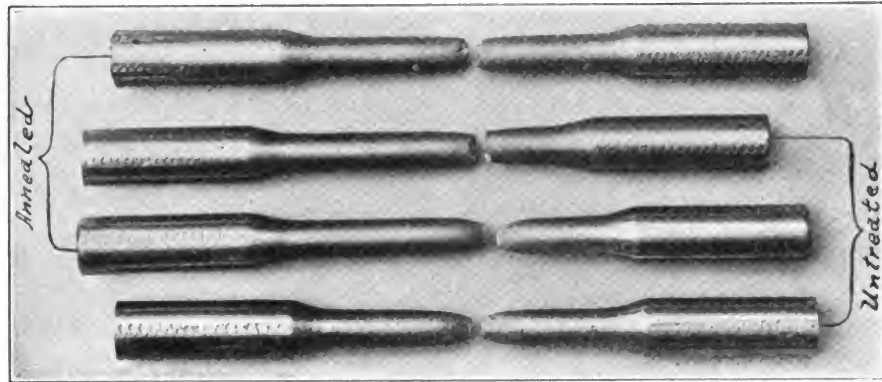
OLD SWEDISH IRON AND ORDINARY WROUGHT IRON PIECES AFTER BEING IN THE TESTING MACHINE
